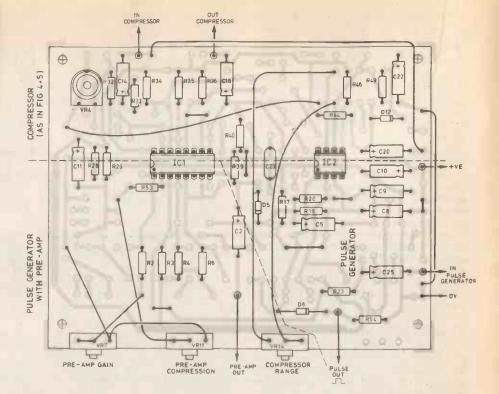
6. Pulse Generator and Compressor component layout on the master printed circuit board. – Plan F.
